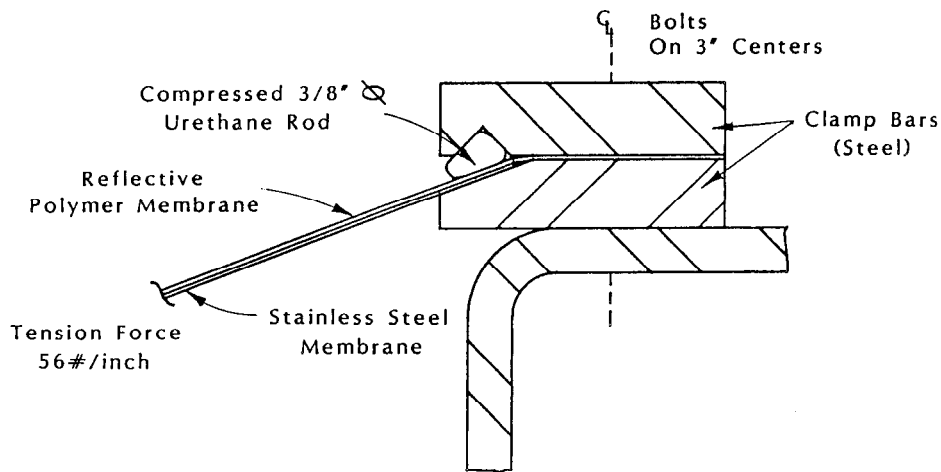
Cross Section of Formed Membrane Departure Bar on Optical Element Ring Showing Final Assembly Membrane Clamping Arrangement.
